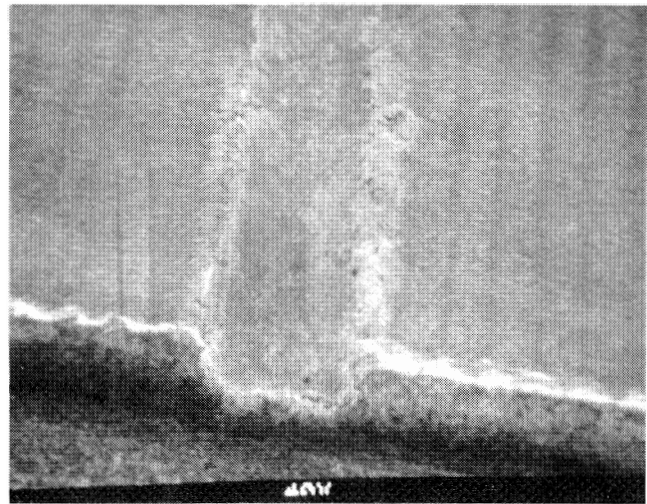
Showing Slight Corner Damage with No Thermal Cracking in Material "A".
